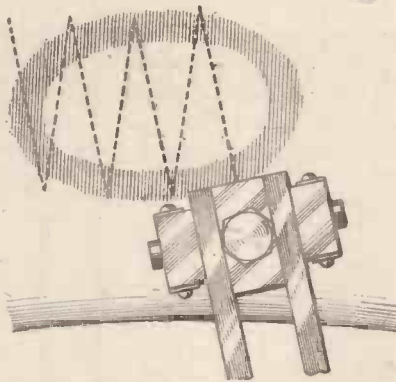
The method to be adopted when rolling out a dent with a special dent-removing tool. The broken line shows the path of the rollers.
